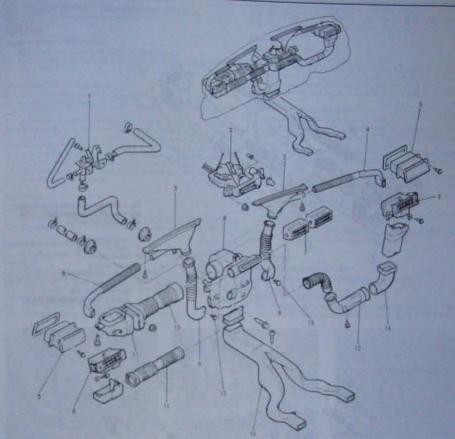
Exploded view of the heater and associated components - early models (Secs 9 to 14) 5 Vantilator ducts
